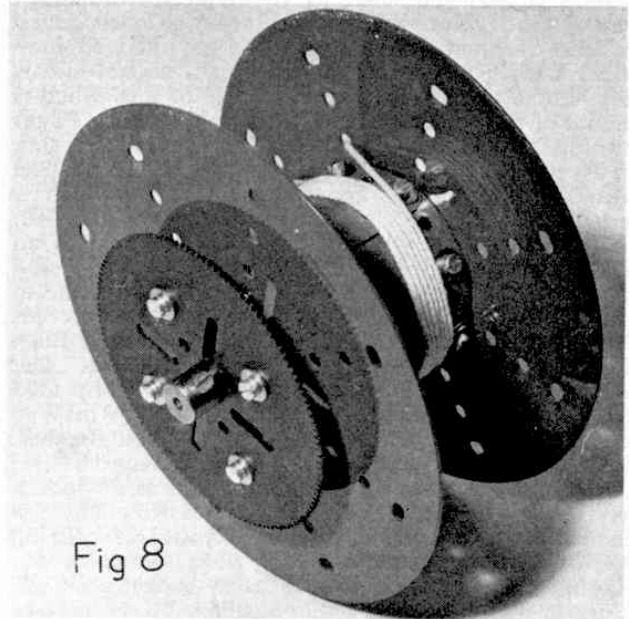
A "deep-throated" winding drum for a colliery winding engine or large model dragline. The driving gear is bolted directly to the drum for rugged drive.
